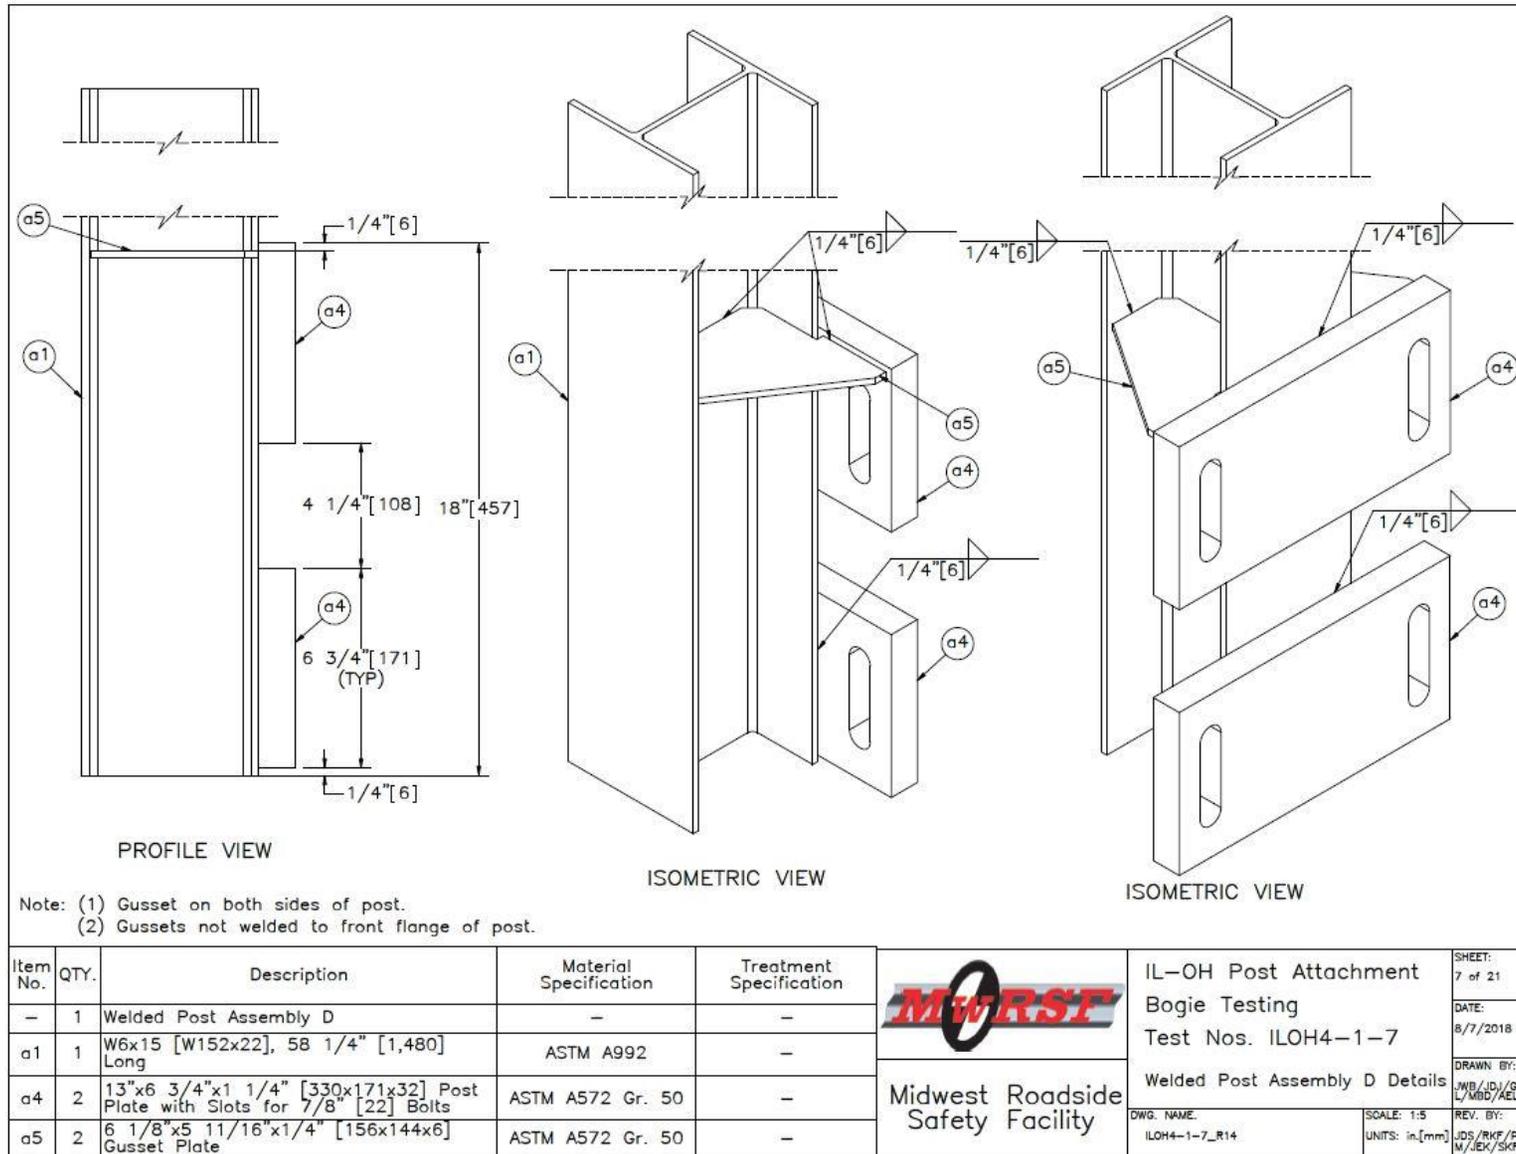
Welded Post Assembly D Details, Test No. ILOH4-2
